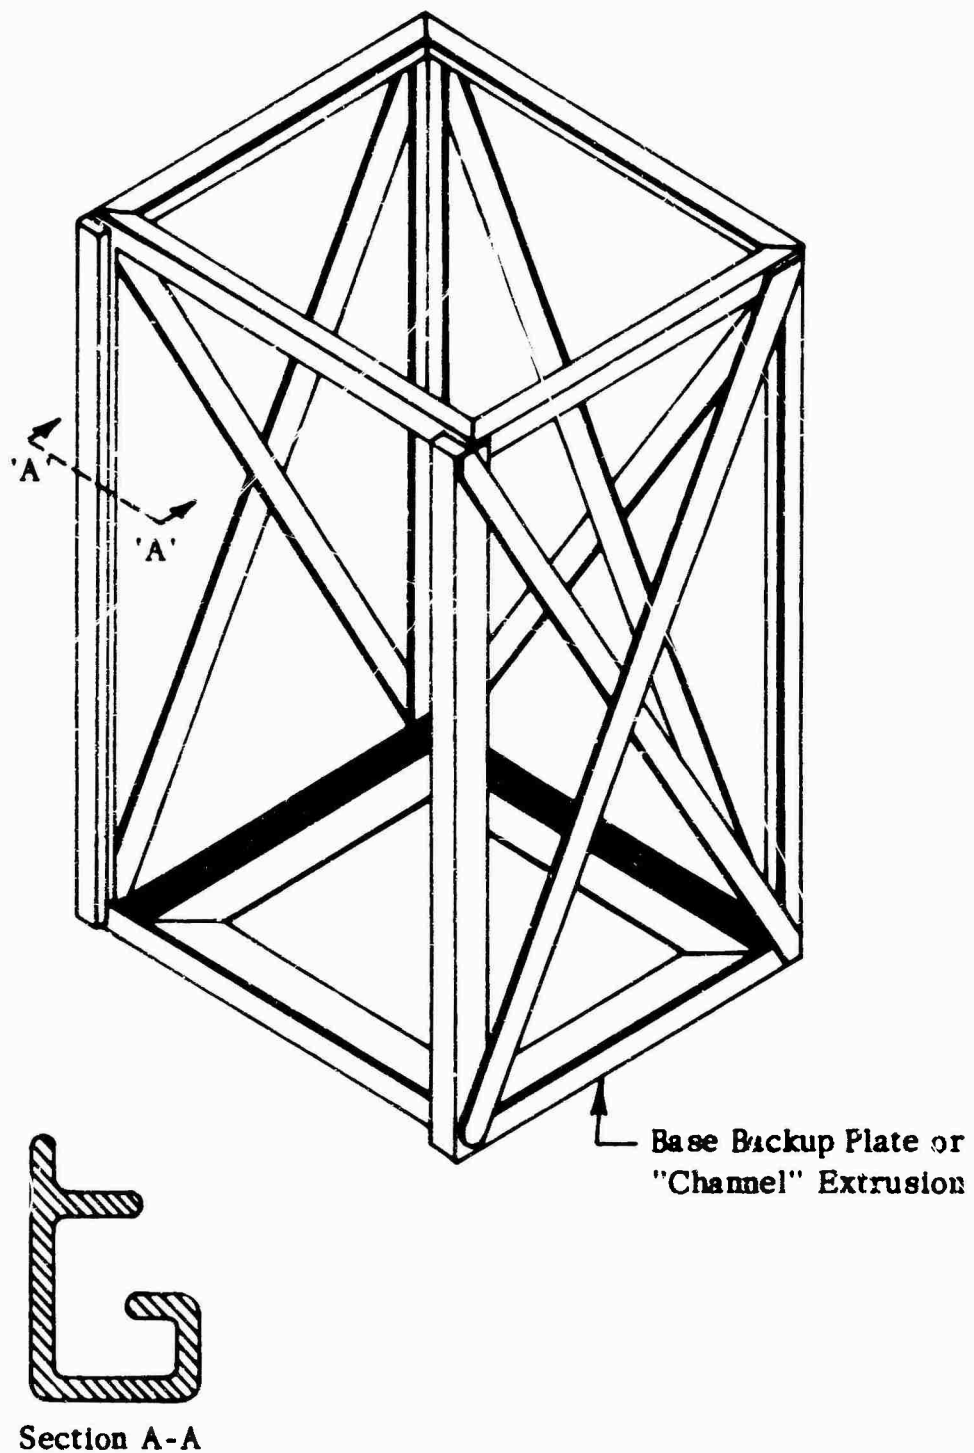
WELDED ALUMINUM CONTAINER FRAME SHOWING
